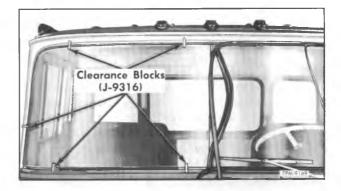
Checking Glass Clearance (Tilt Cab Model)
